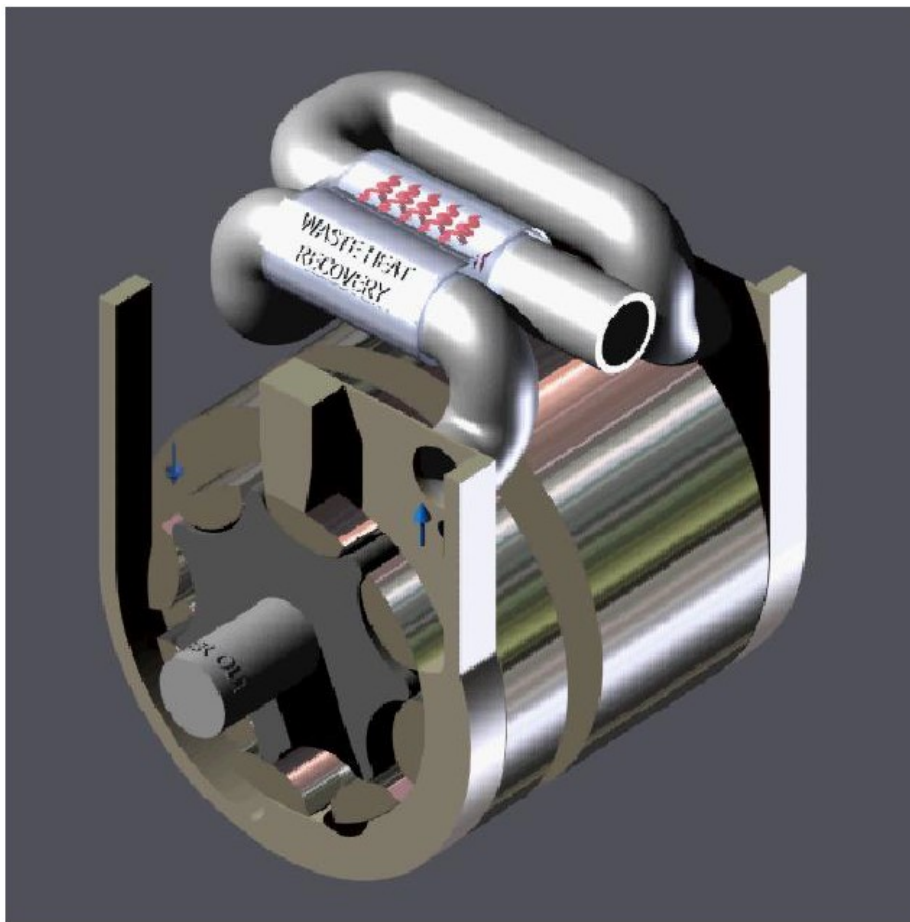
Reprinted figure from Ref. [10]. Three dimension schematic of the StarRotor Engine.
